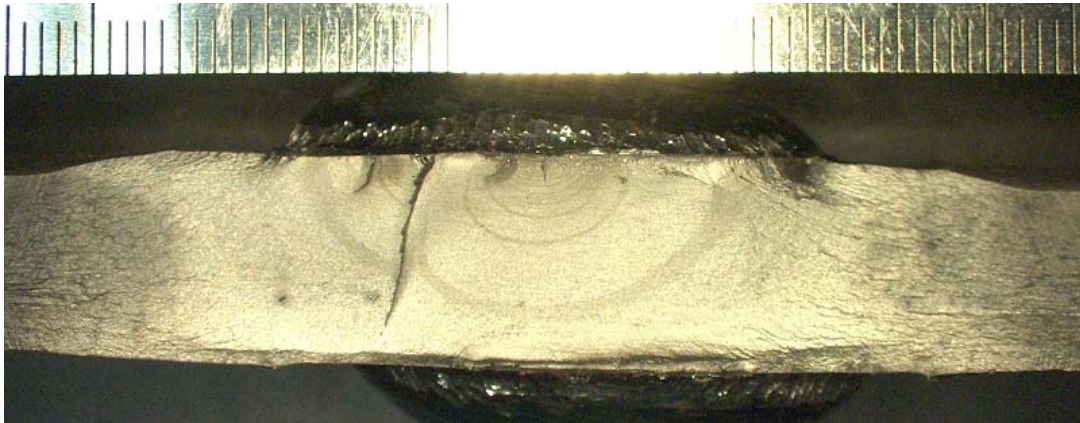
Fracture cross-section after fatigue test under beach mark method
